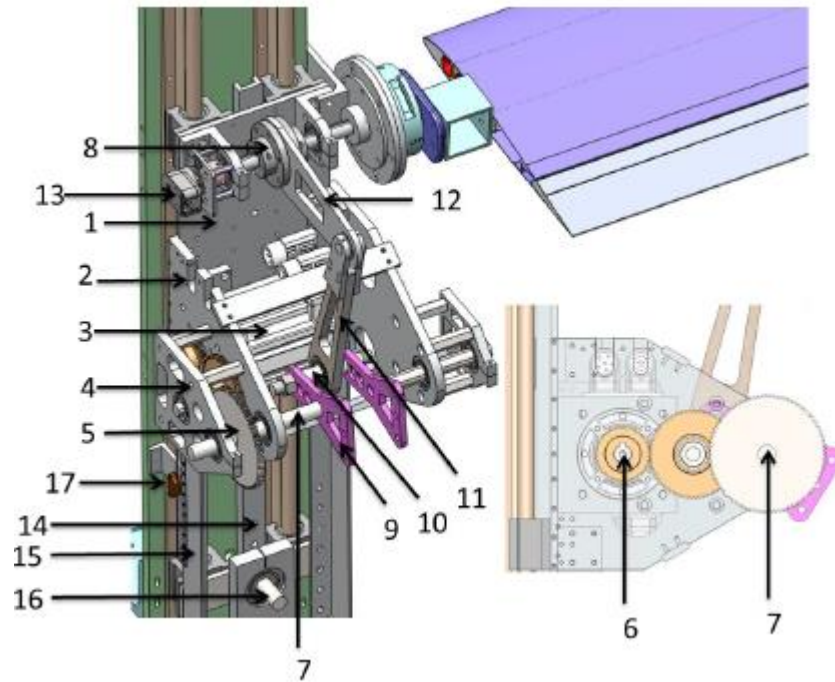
Port side pitch module 1. Back Plate, 2. Wall, 3. Pitch Actuator, 4. Mini Wall, 5. Gearbox, 6. Motor Shaft, 7. Drive Shaft, 8. Wing Shaft, 9. Crank, 10. Drive Pin, 11. Connecting Rod, 12. Wing Bar, 13. Spine, 14. Extension Channel, 15. Plunge Encoder [2]
